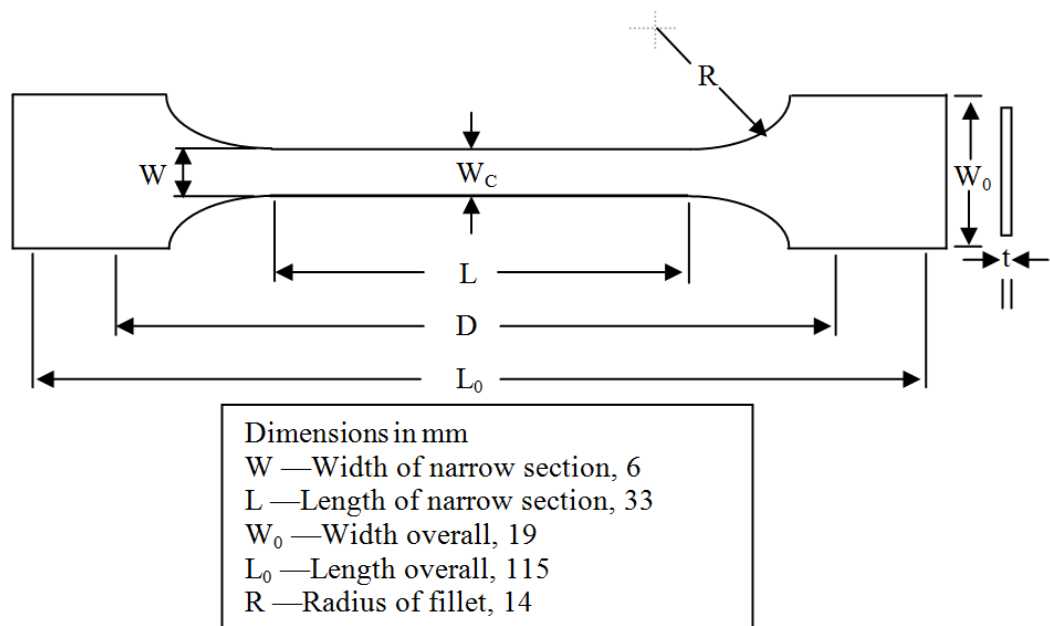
ASTM D 638 type IV dimension for tensile test specimen
